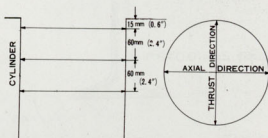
Measuring Points X0313 of Cylinder Bore
